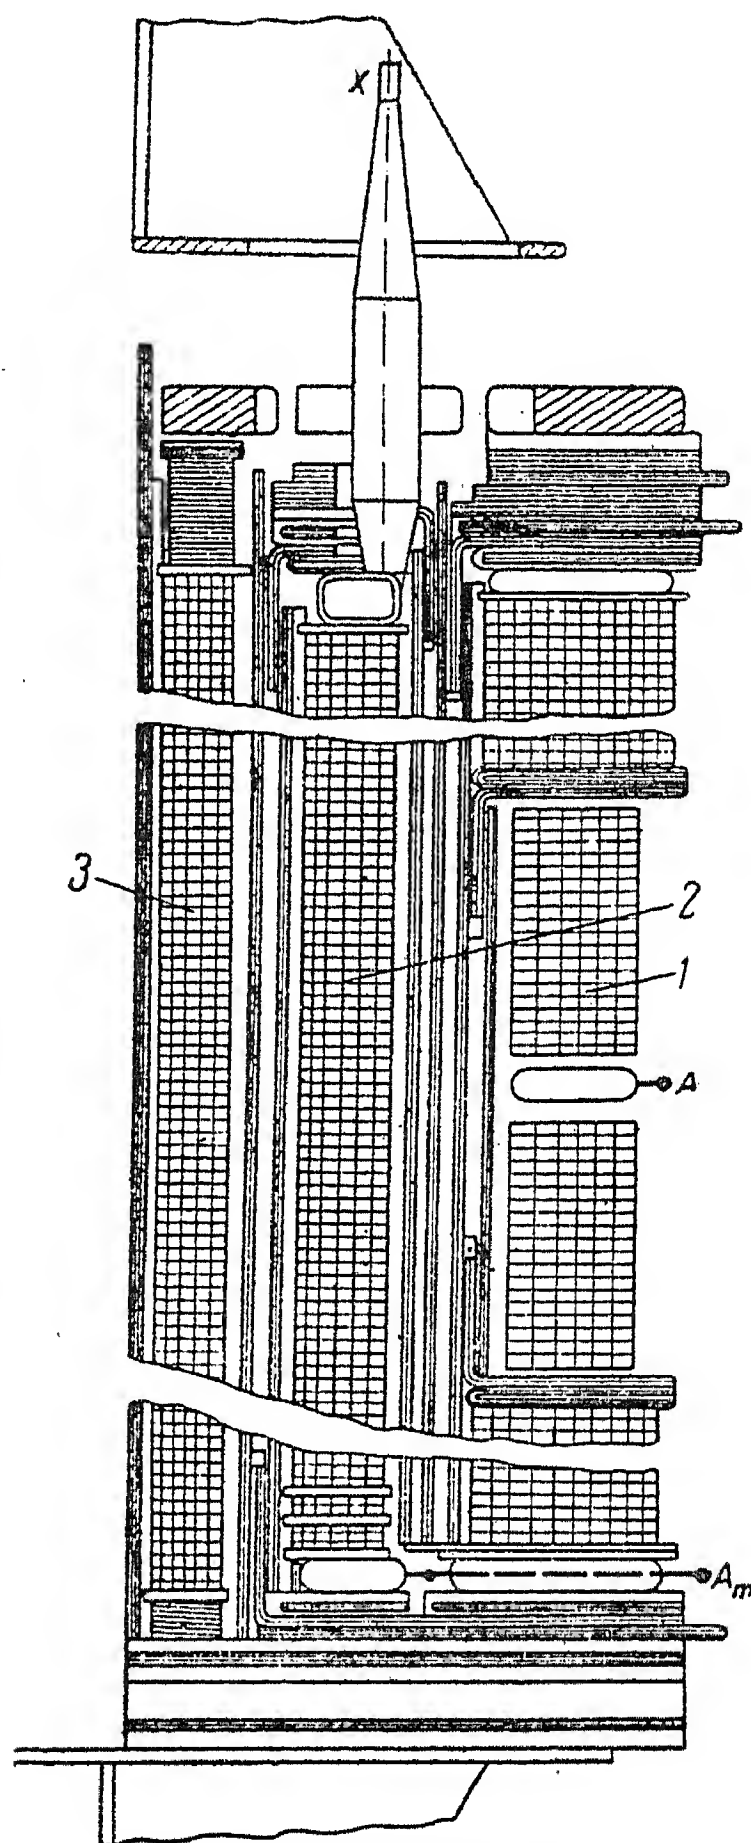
Construction of 220/110/6 - 10 kV auto-transformer. 1 - H.V. winding; 2 - M.V. winding; 3 - L.V. winding.
